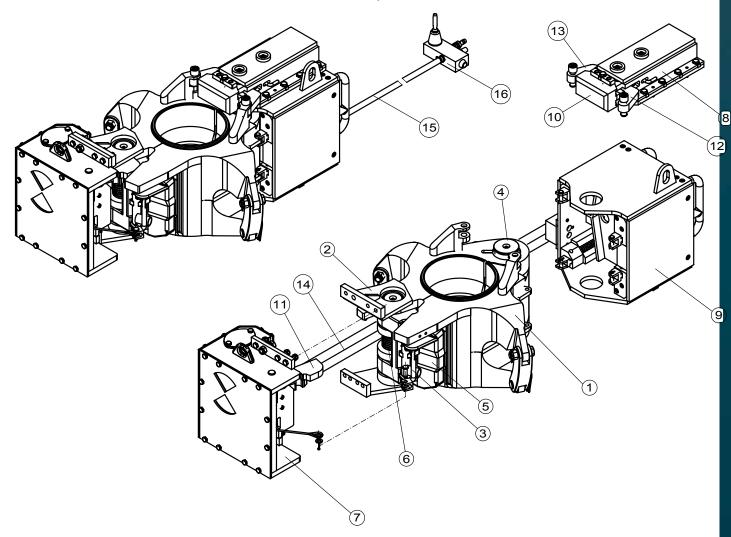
613970-Y VES ACL-350 / 615970-Y VES ACL-500 Exploded view
